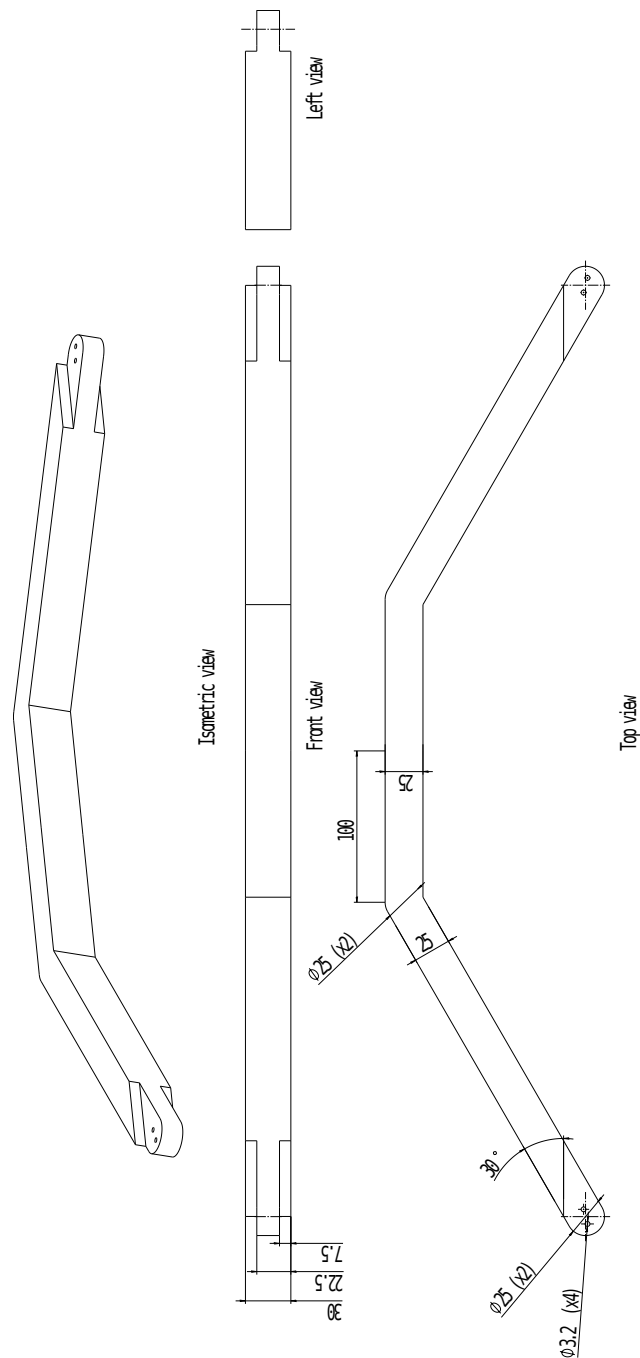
Technical drawing of the main part of the fixture for the coupon level validation experiments.
